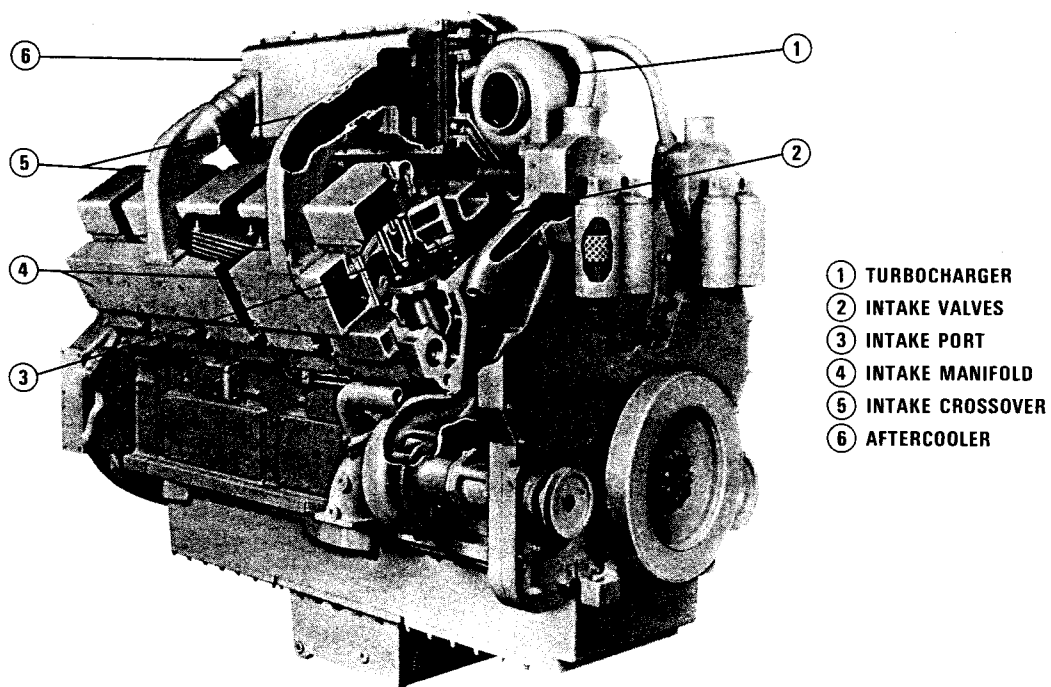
, (AWC-19). Intake air flow — KT(A)-2300 Engine
